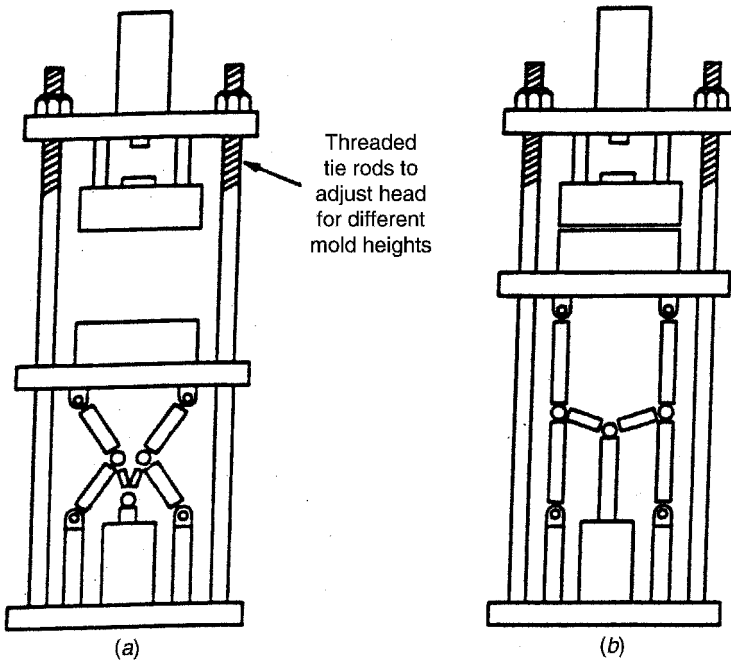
Toggle press: (a) open; (b) closed. Threaded tie rods are used to adjust the head for different mold heights.
